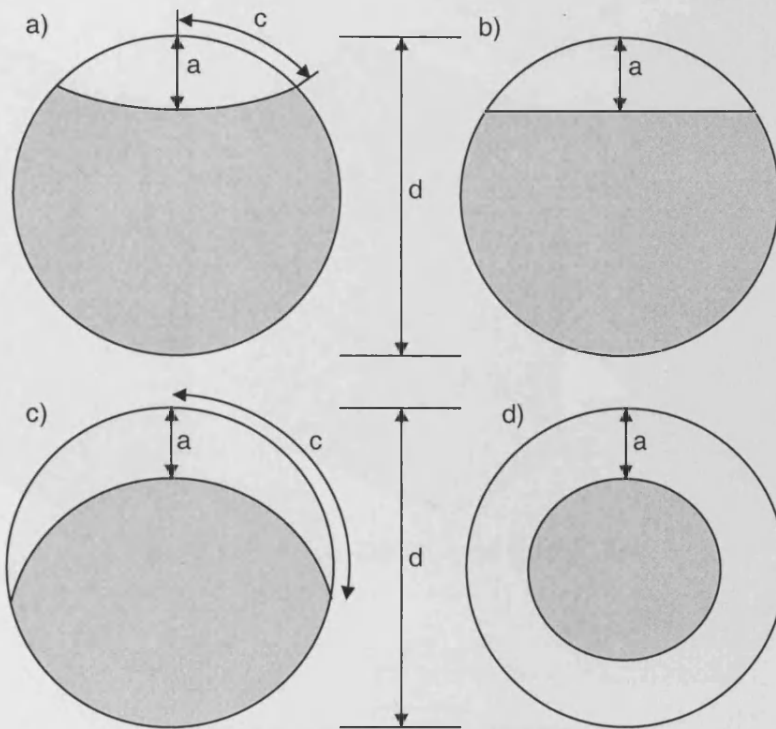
Surface Crack Shapes in Rods a) Semi-Ellipse b) Segment c) Sickle d) Complete Circumference
